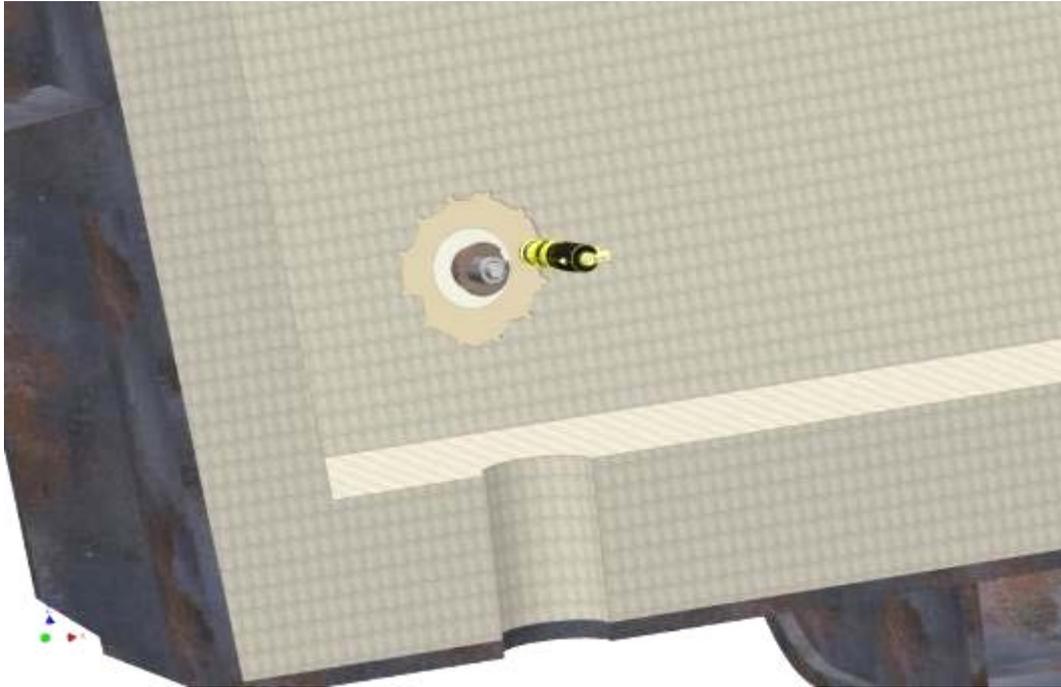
Once the mouldable refractory is level with the block, you can remove the embedding tool and dry the mouldable refractory.
